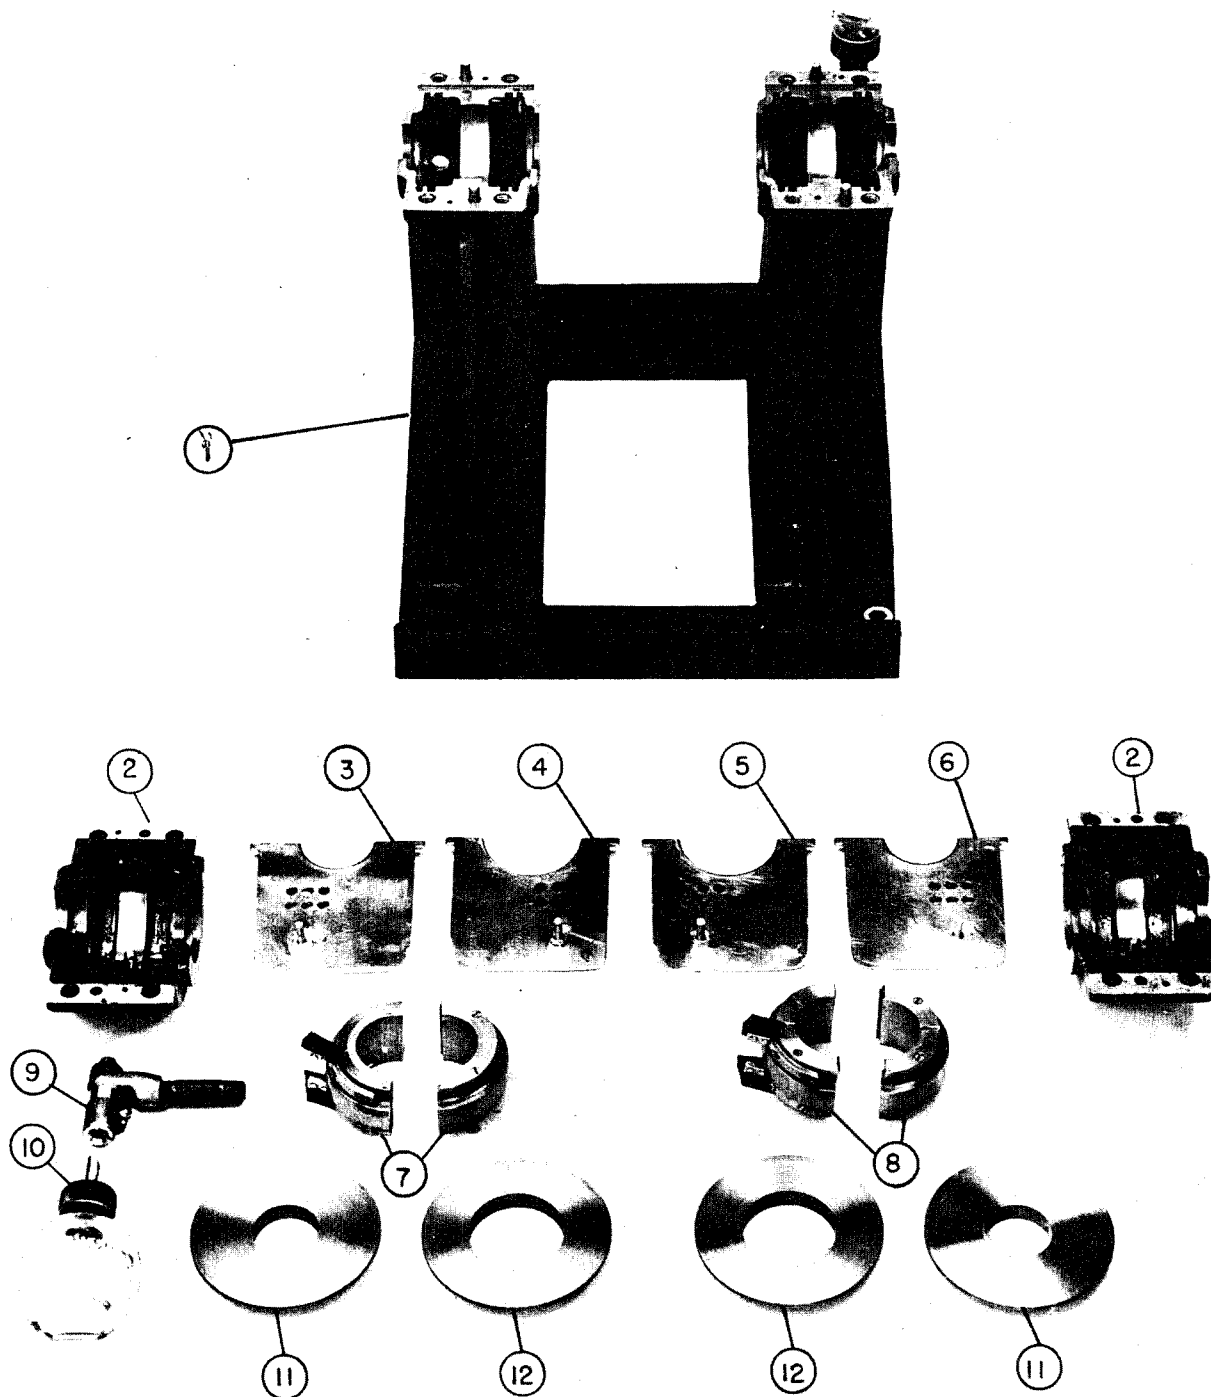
FLYWHEEL SUPPORT AND BEARINGS - DISASSEMBLED
